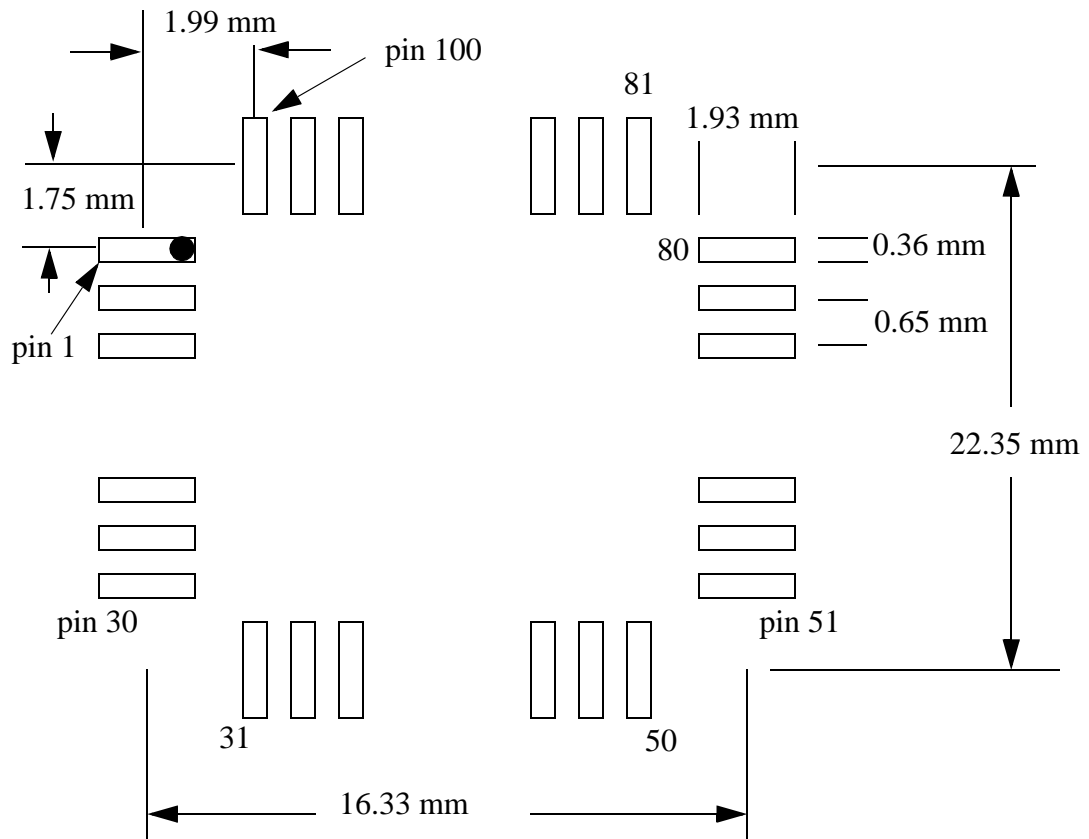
shows the mechanical dimensions of the Rabbit PQFP package.
